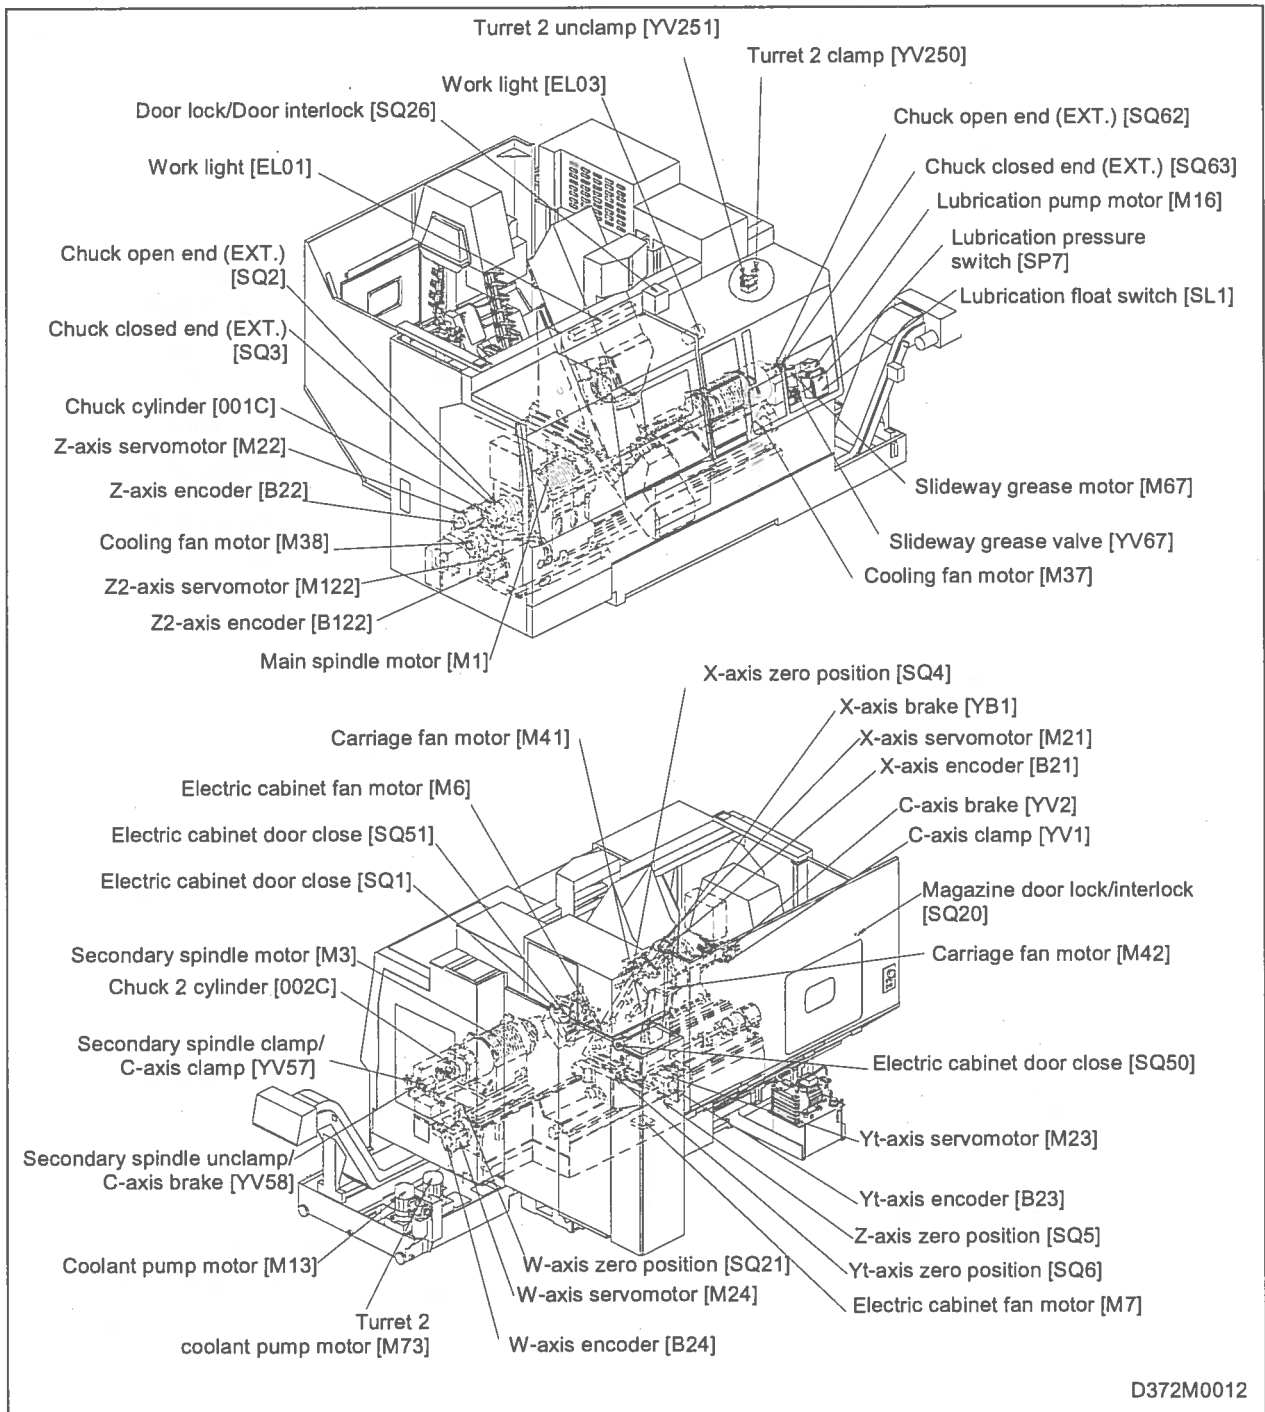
Equipment layout (INTEGREX 100-III[S] [20/40-tool magazine])
